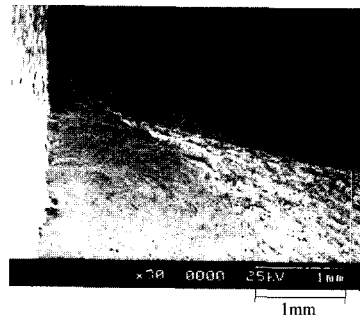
SEM photographs of shot-peening(180°C) fracture
